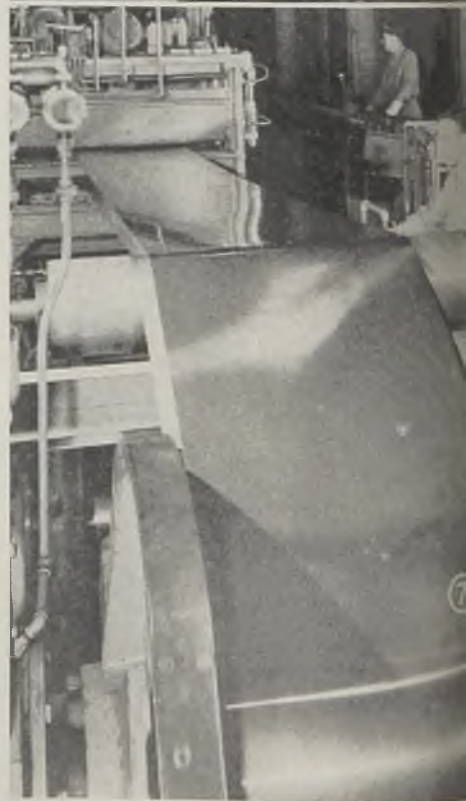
Automatic micrometer, which registers on dial in front of operator, actuates a gate which throws off-gage sheets onto lower conveyor to be piled separately. This is the delivery end of cutting and classifying unit looking across control desk in direction of travel of strip
